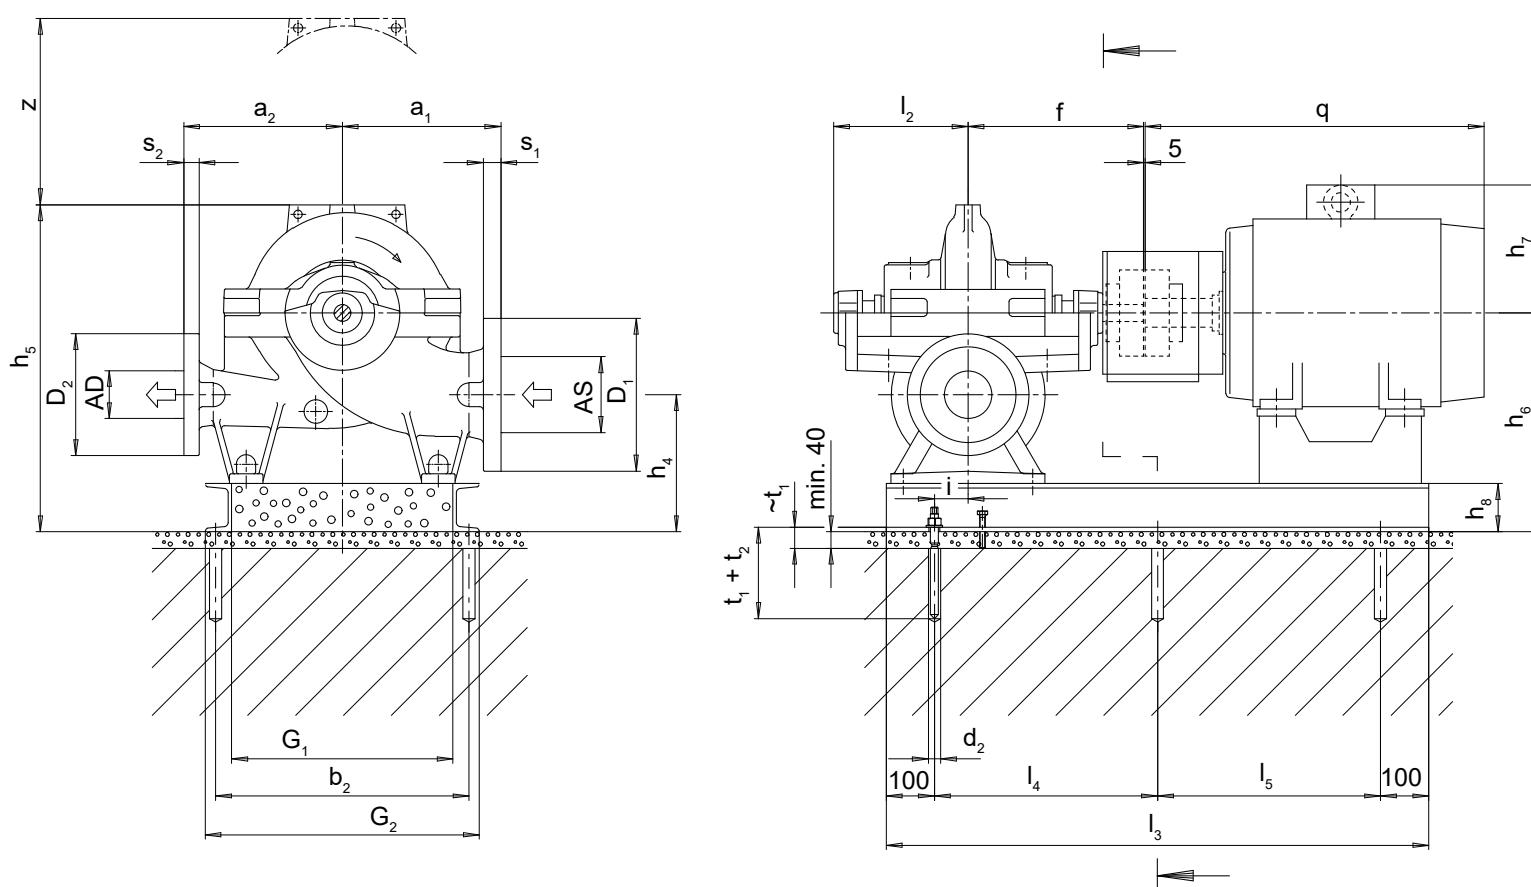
3E base frame with motor base (6 chemical anchors), dimensions in [mm]
